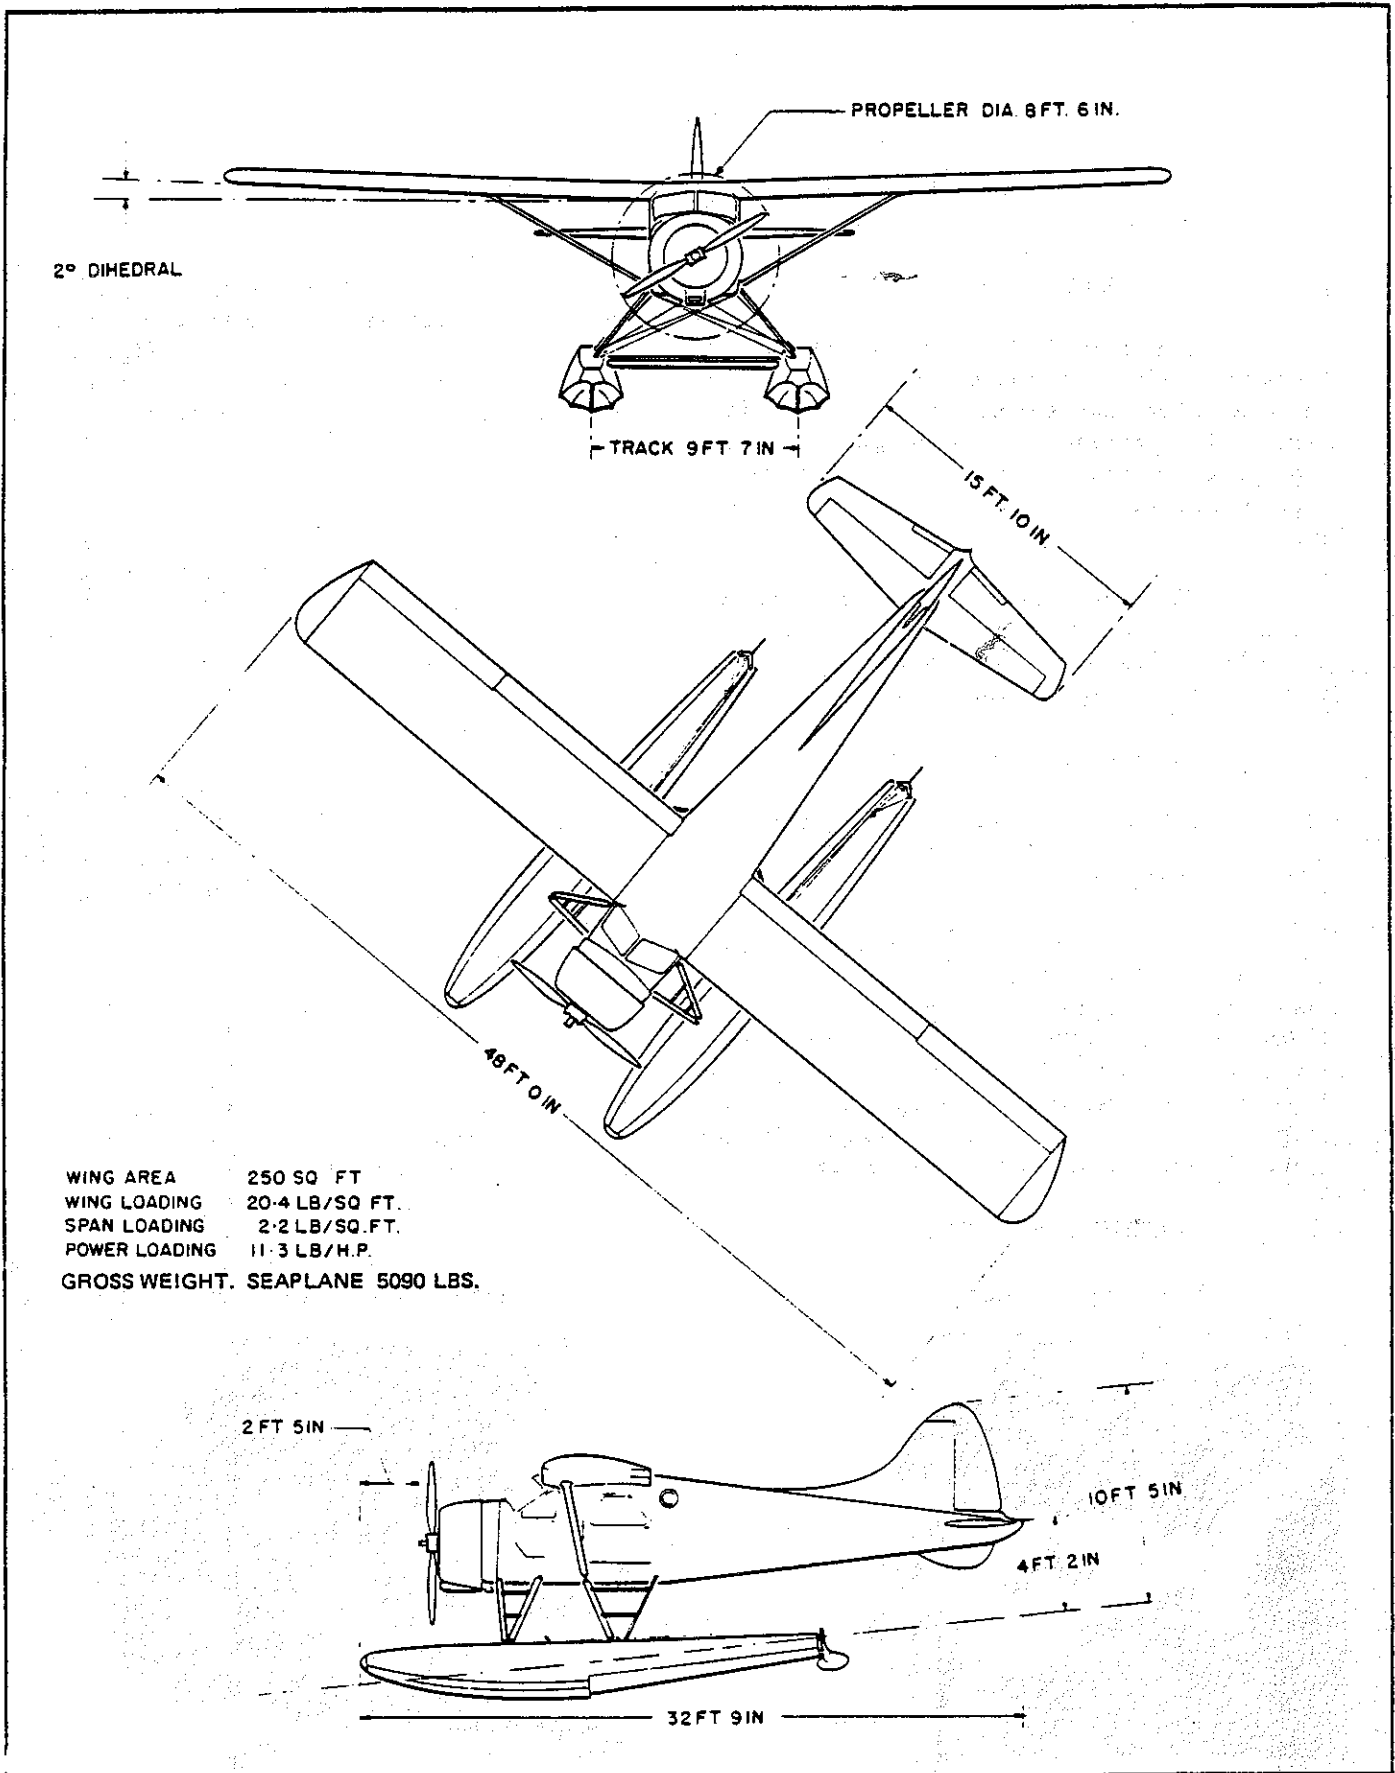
THREE VIEW DIMENSIONAL DIAGRAM - SEAPLANE
